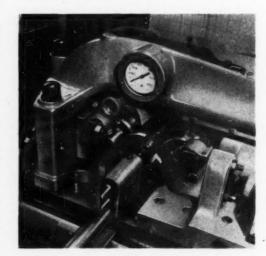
Steinle No. 1 Thread Rolling Machine Set Up for Rolling Oil Grooves in the Crankshaft
